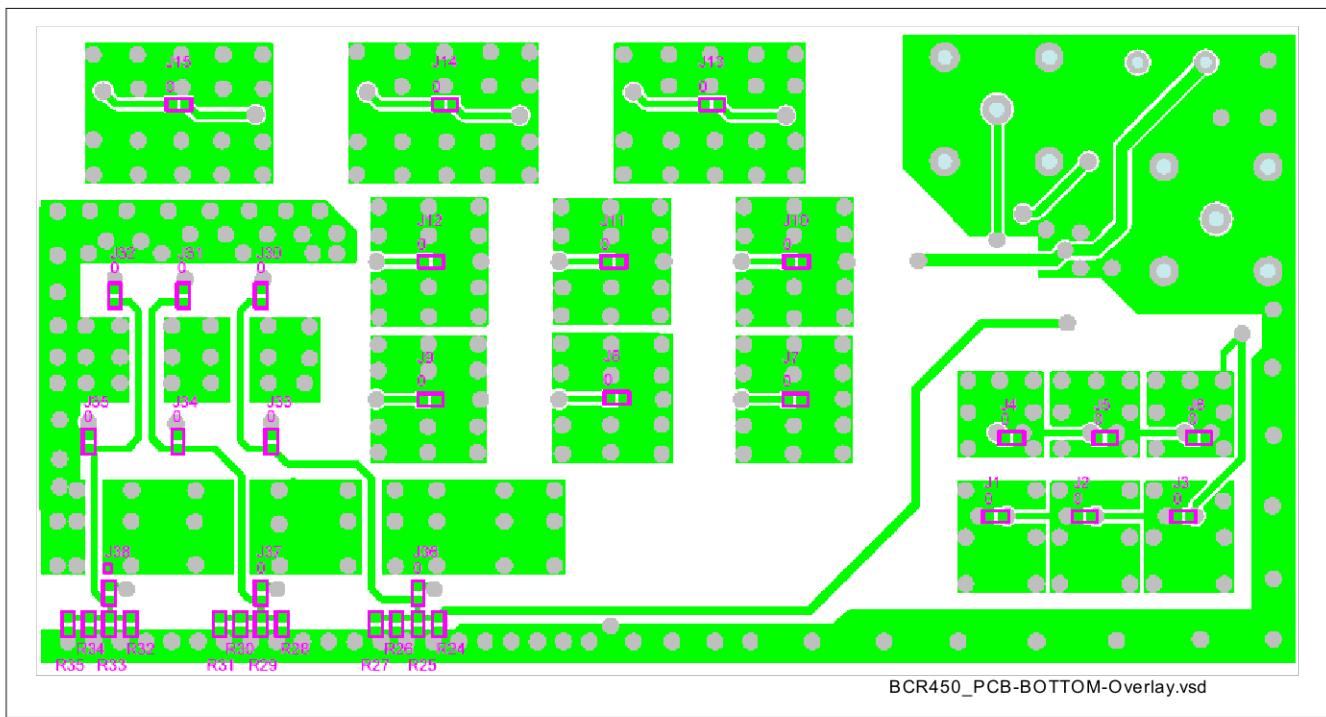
Bottom view on evaluation board (dimension 60 mm x 120 mm)
